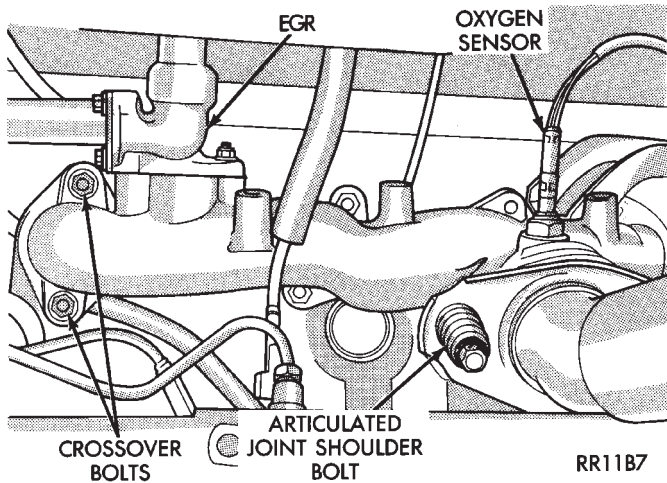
Separate Articulated Joint, Disconnect Oxygen Sensor Wire
